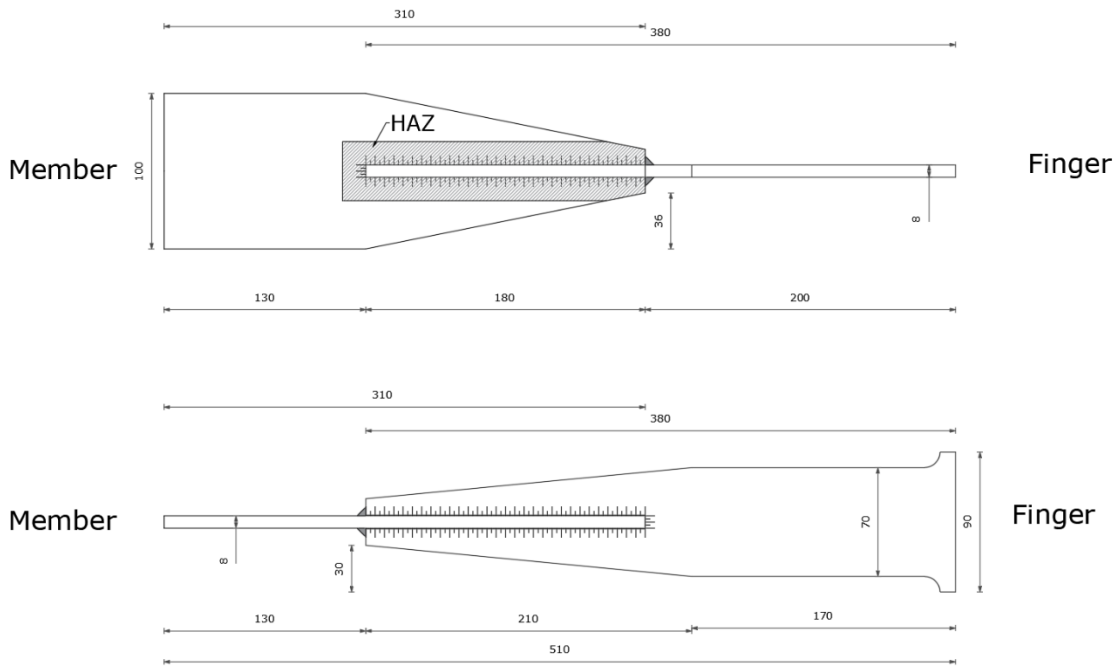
Applied dimensions in the numerical model of the welded cruciform variant 4.
